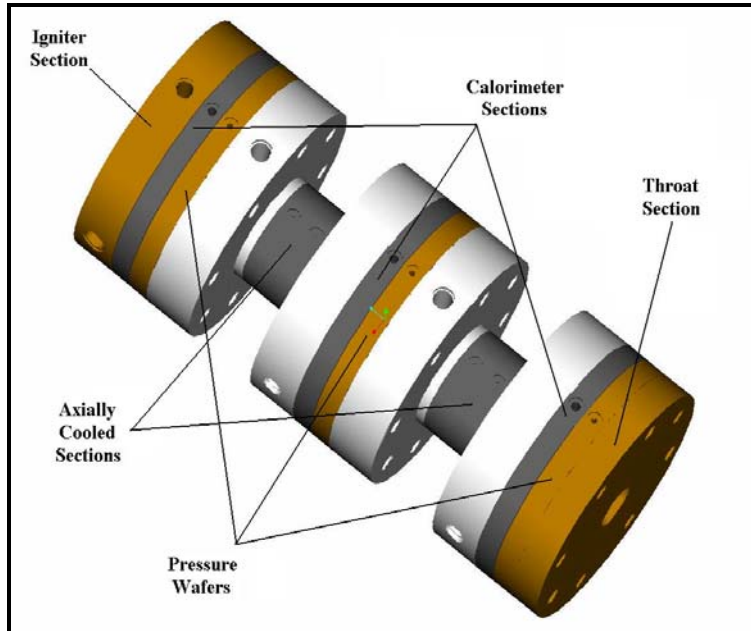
CAD Rendering of Purdue University Single Element Test Chamber
